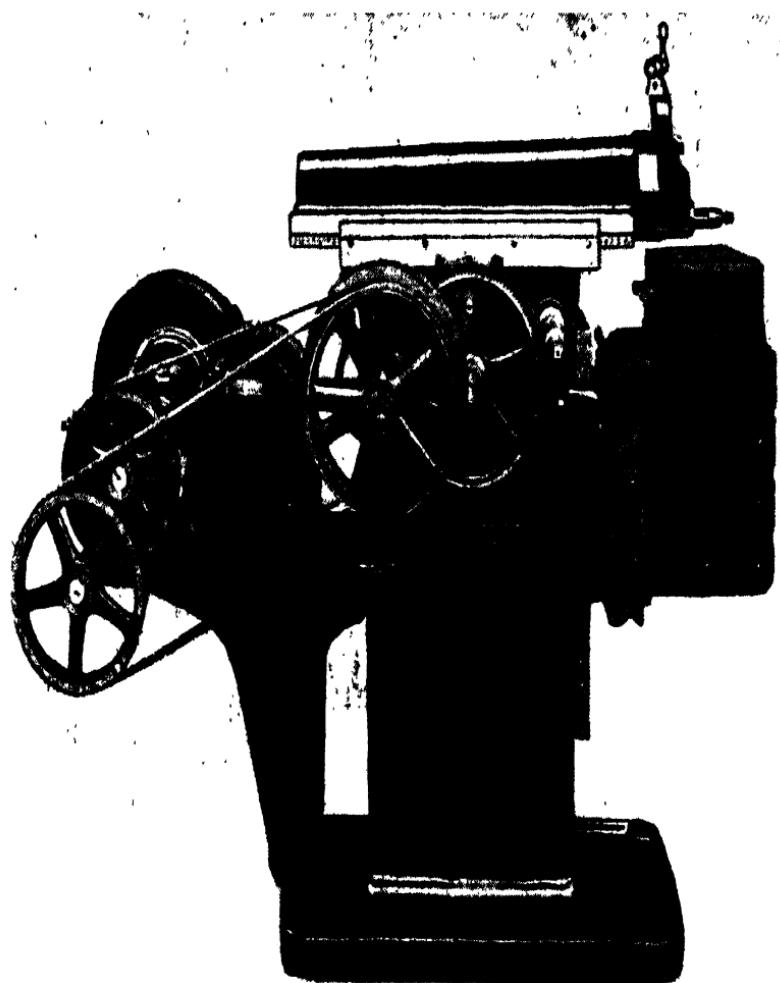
Metal-shaper belt driven from individual motor. (*Courtesy of The Hendey Machine Company.*)
